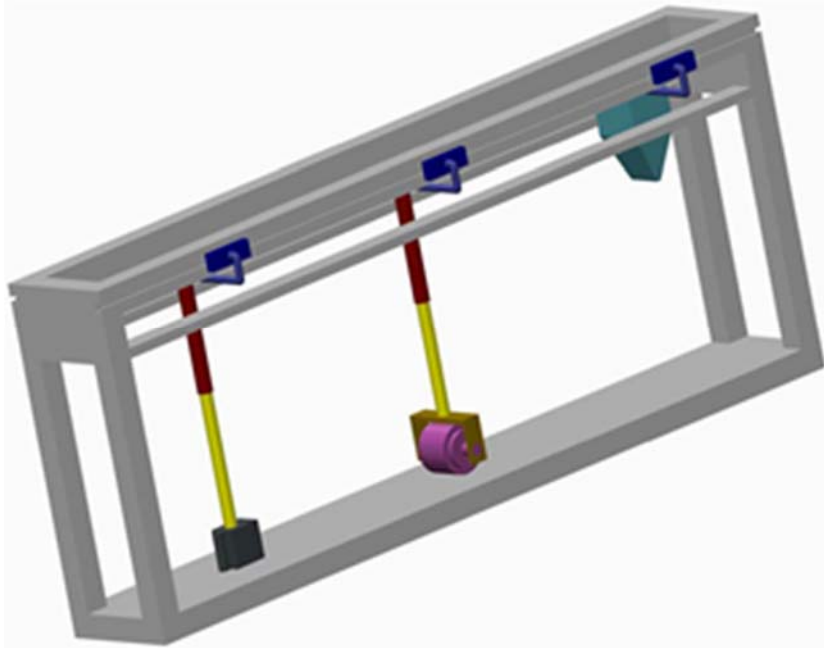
CAD Drawing of Assembly design #2: Coating SLMP by translating components
